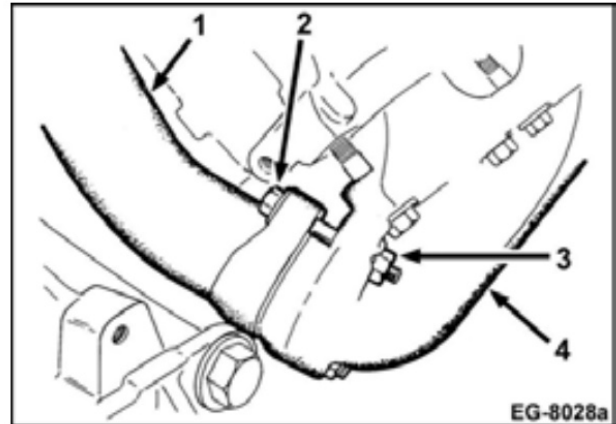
Installing Right Exhaust Tube Mounting Hardware at Exhaust Manifolds
